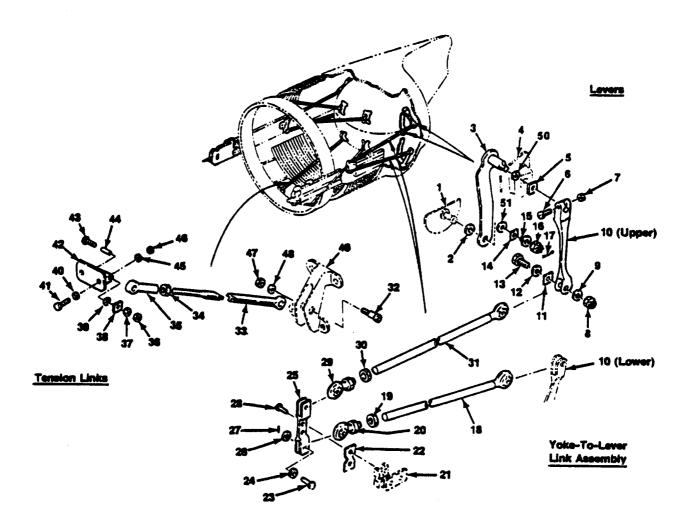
Tension Links and Yoke-to-Lever Assemblies, Exploded View
